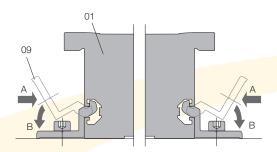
Hook Fixing Brackets in the Solar Collector Profile
